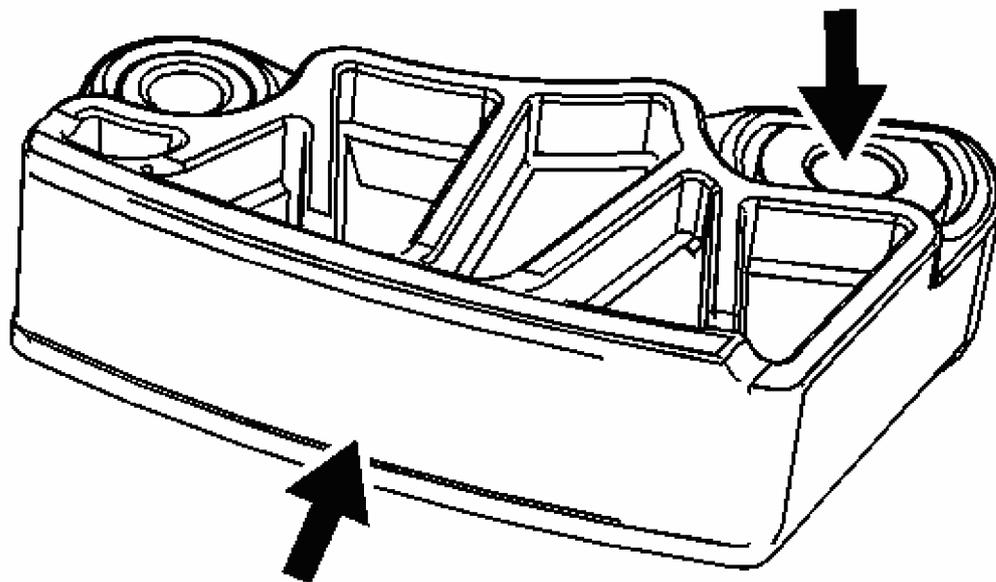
Identifying Primary Camshaft Drive Chain Lower Guide Inspection Areas
